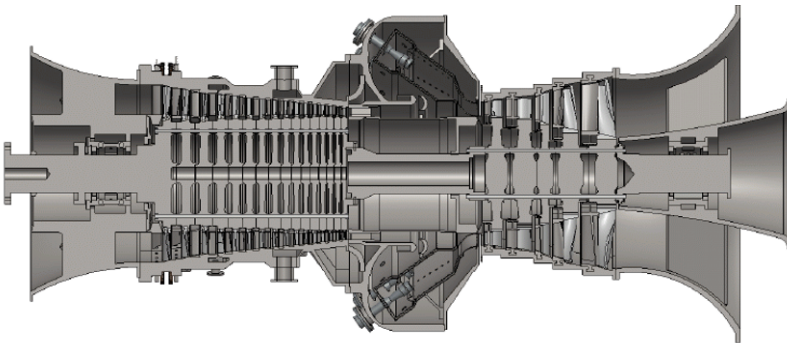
Gas turbine rotor, Turbomachinery Design Project, Texas A&M.
